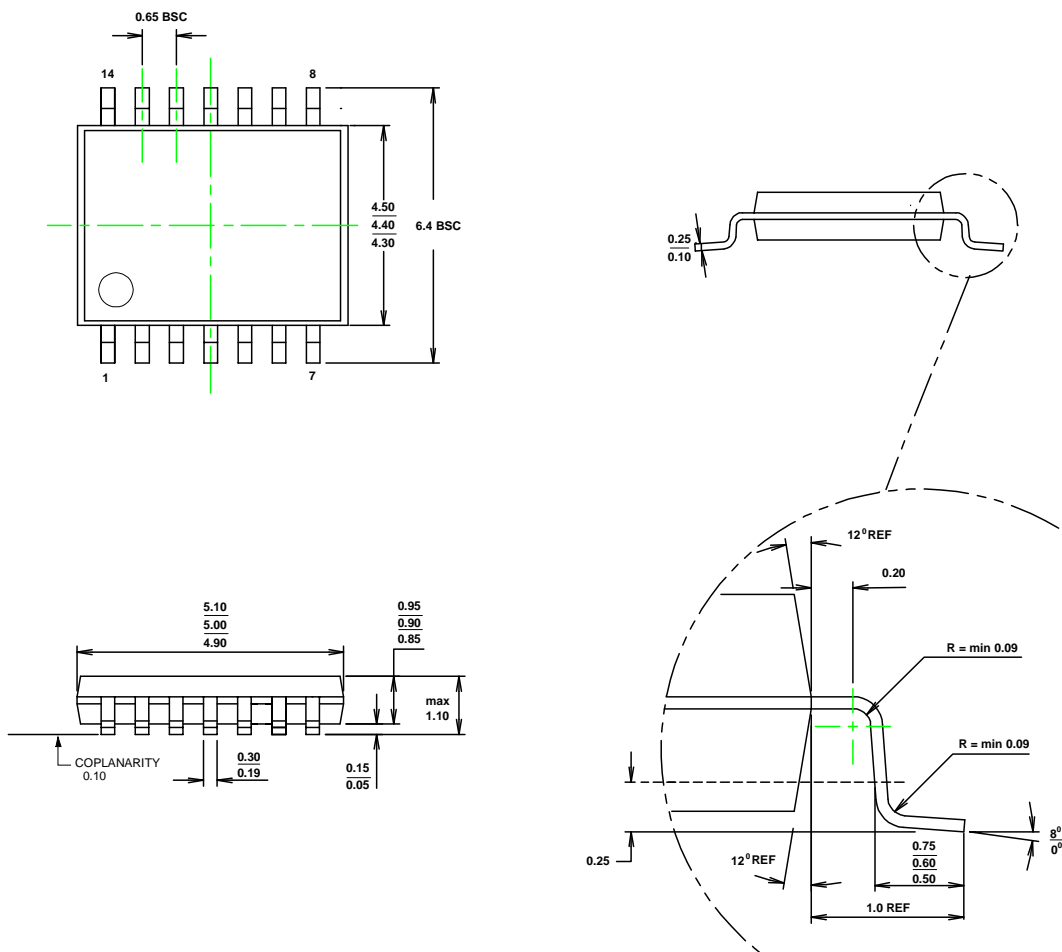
14-Lead TSSOP Package Dimensions shown in millimeters
